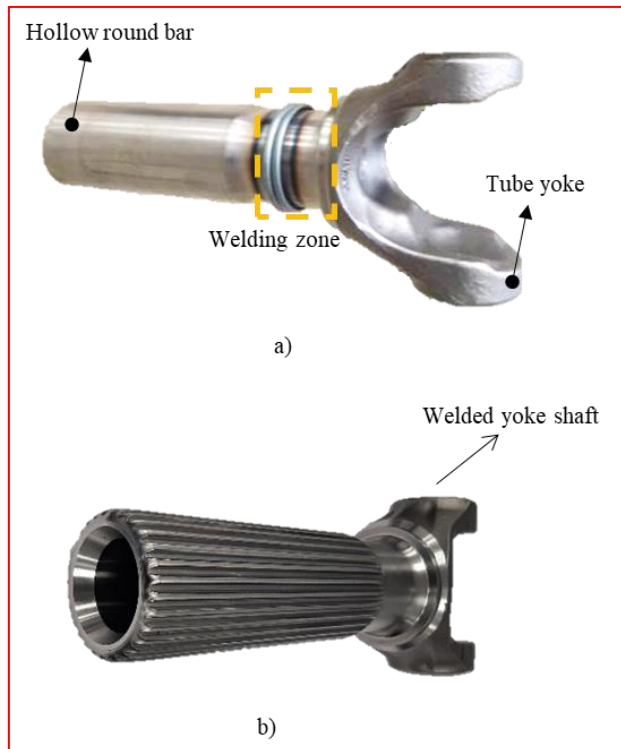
A welded yoke shaft specimen, a) before finish operations (splining, turning, etc.), b) after finish operations (splining, machining, etc.)
